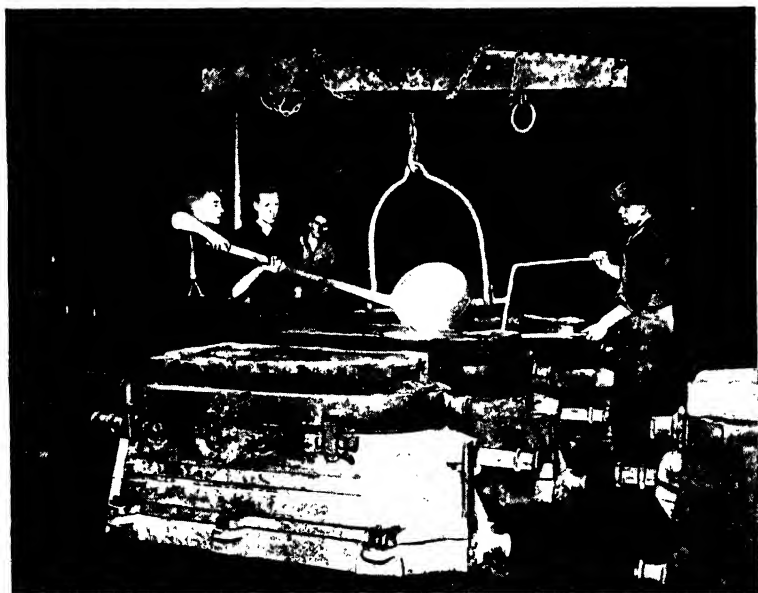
Above:* Pouring iron into a mould in bath manufacture.
